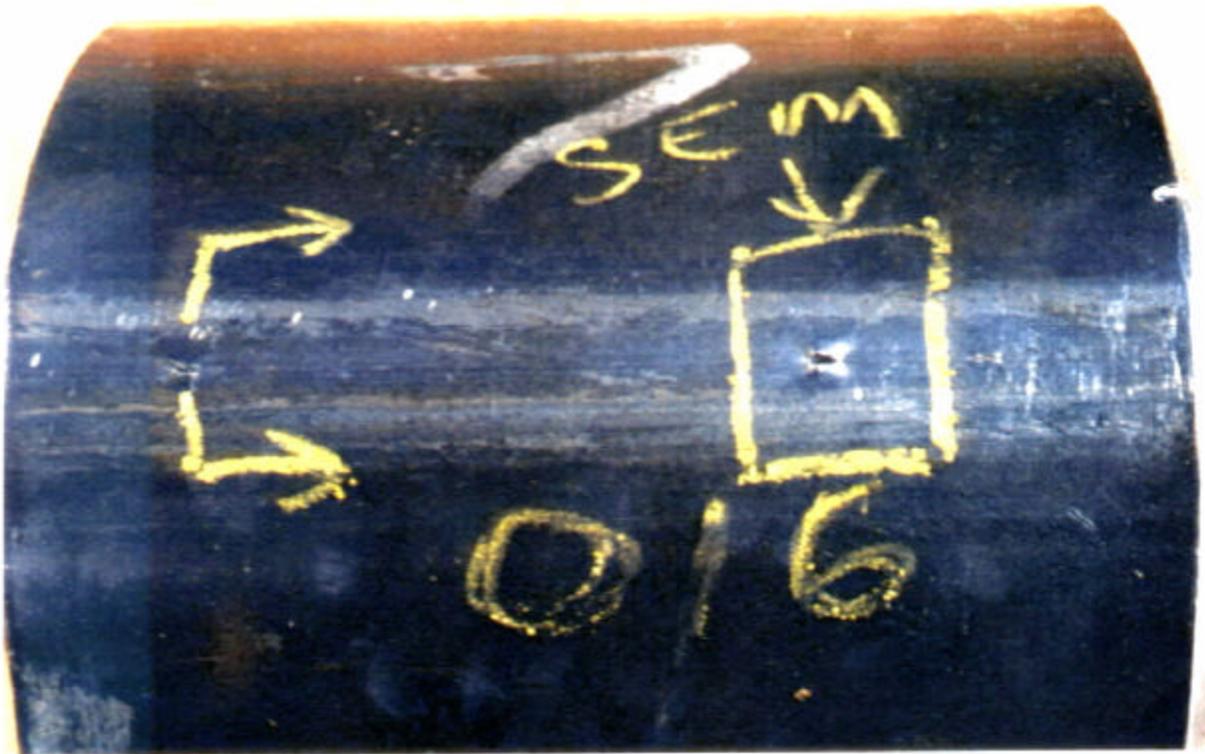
Typical API flattening test showing split failures in the ERW weld seam
